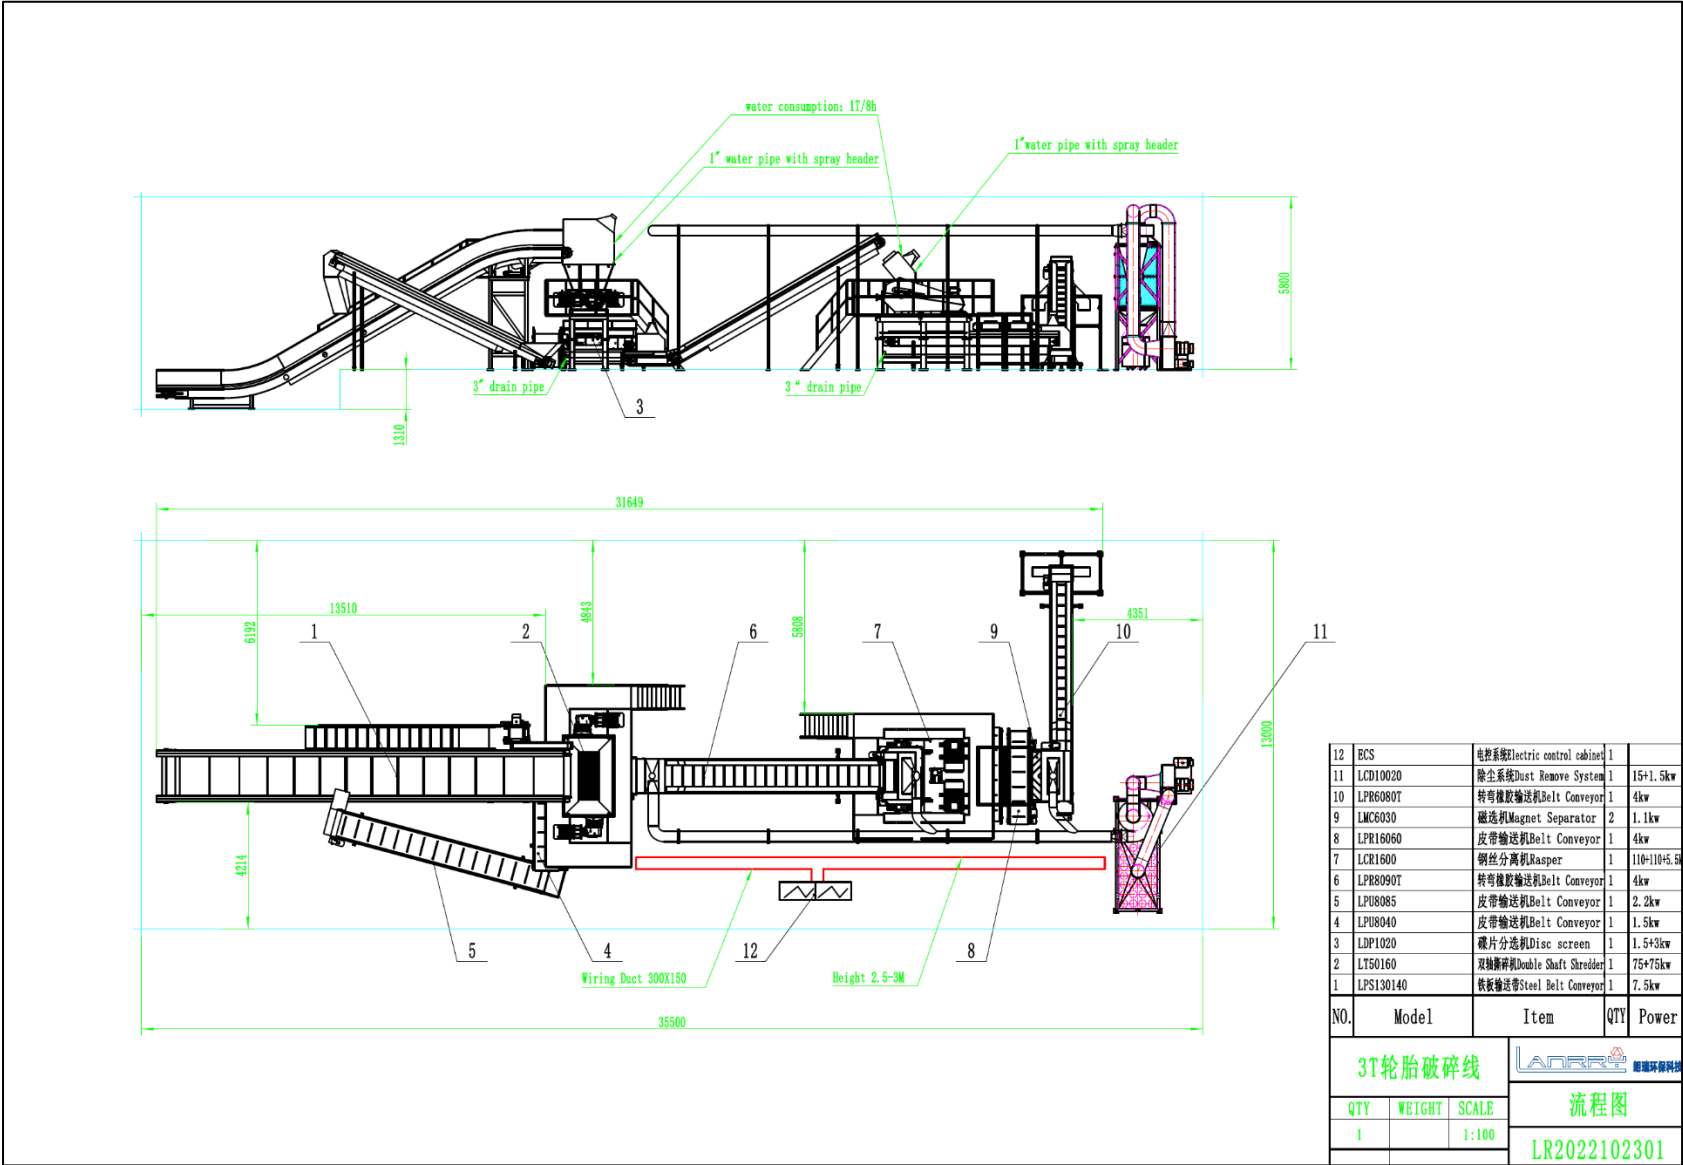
Plan and elevation drawing of the new tyre recycling plant to be installed in Unit 11
